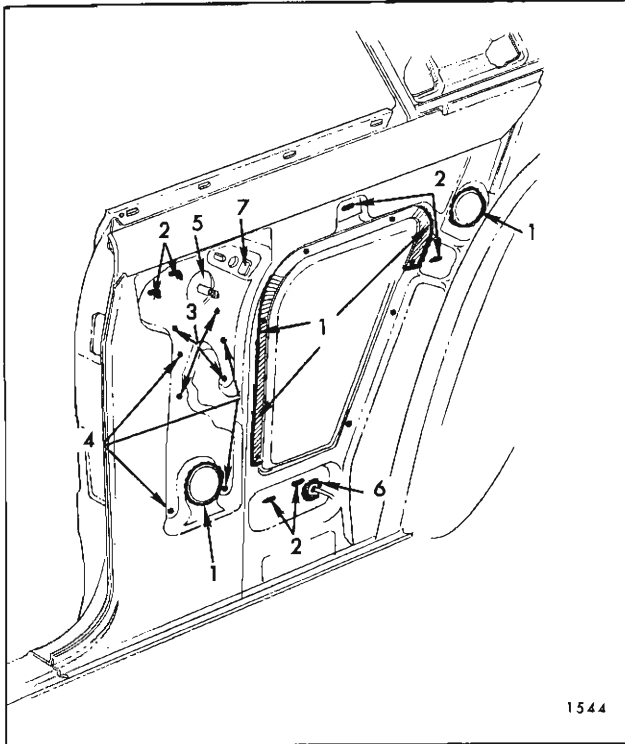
E12—Rear Quarter Inner Panel Sealing - "37" Styles
